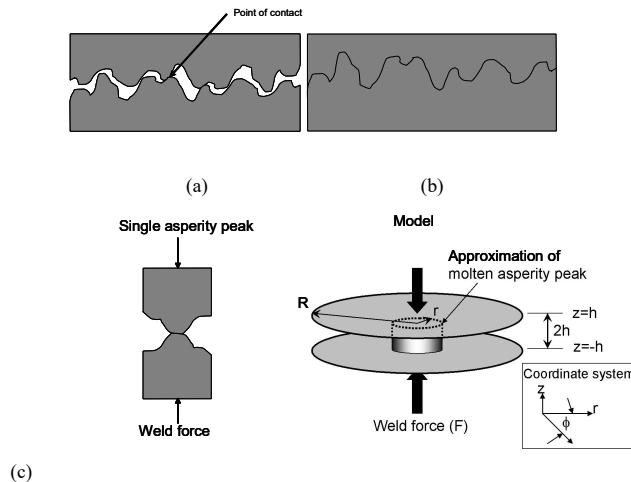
Cartoon of polymer interface with asperity peaks, (a) before welding (b) after welding and (c) idealized model
